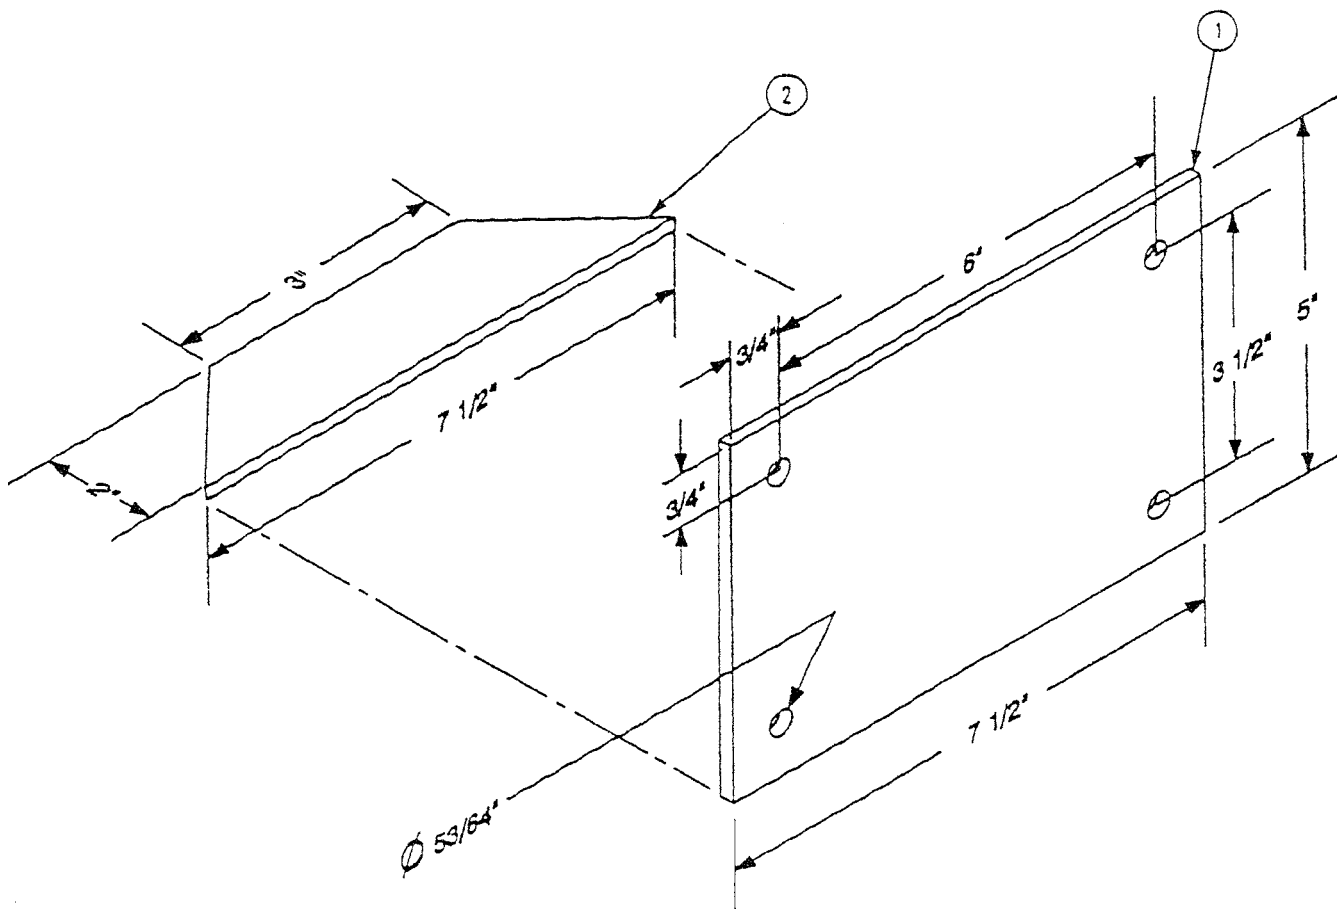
100/200-Amp Regulator Mounting Hole Template
